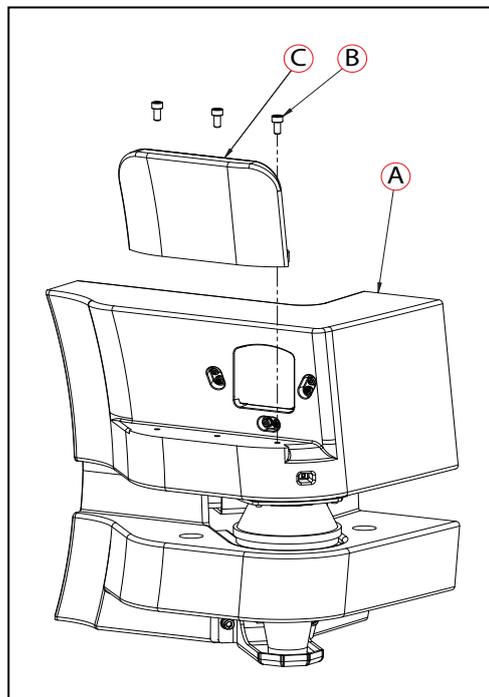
(A) Laser Corner, (B) M6 Screw, and (C) Laser Cover Fin
